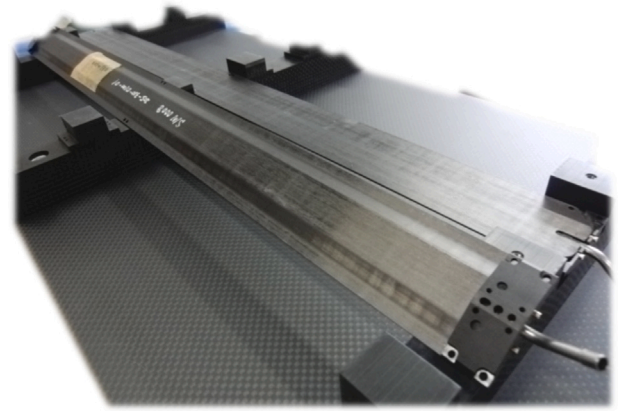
The mechanical design of the edge of the stave. The HDI is assembled on the bottom flat CFC plate.
